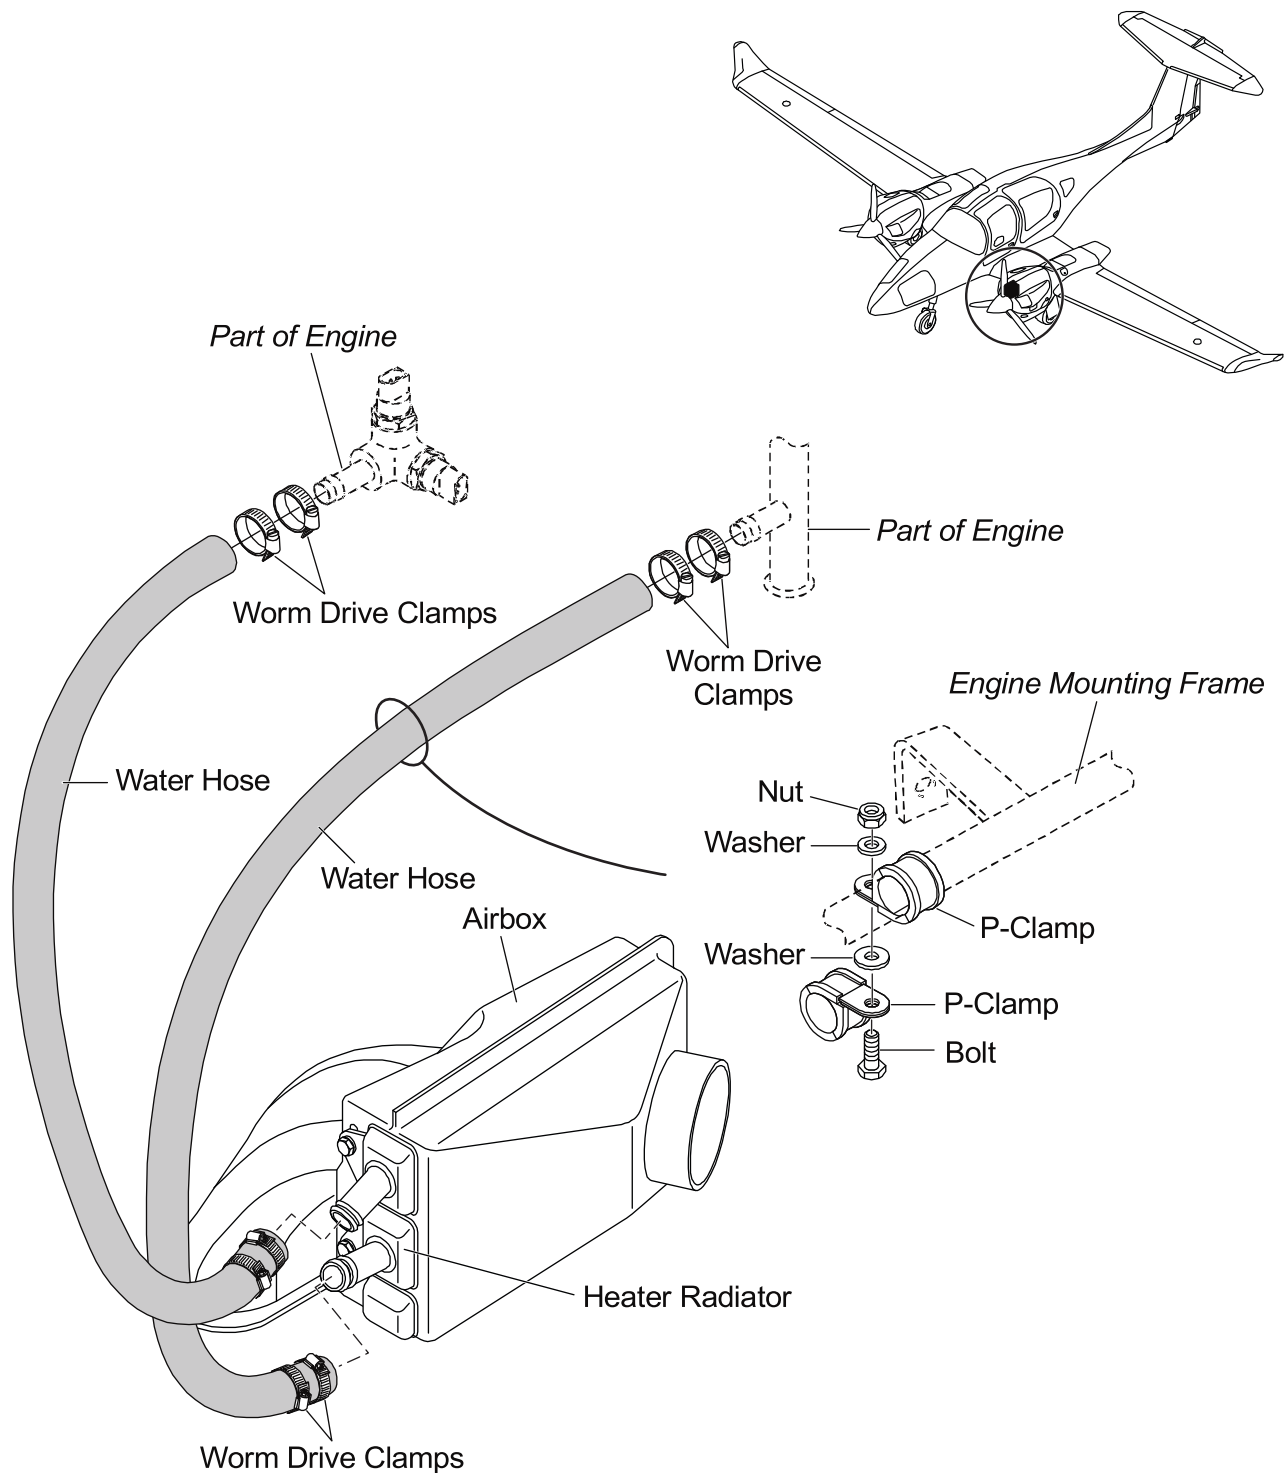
Heat Exchanger Installation - Sheet 3 of 3
